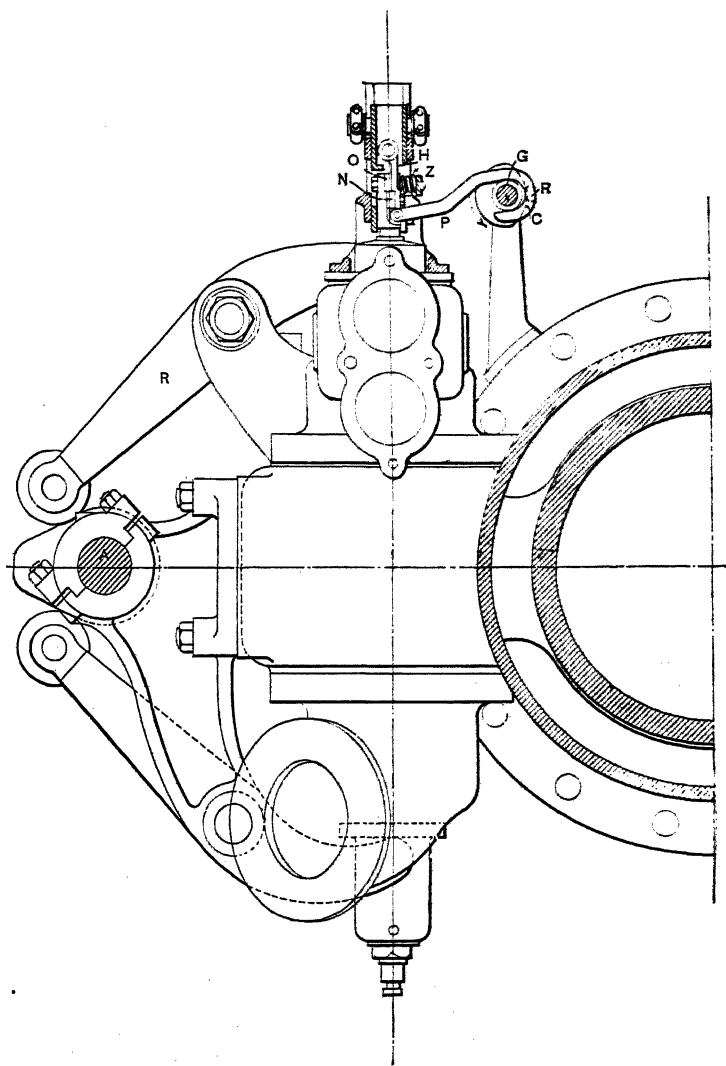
The "Snow" Standard Valve Gear. Cross-section through Cylinder.
